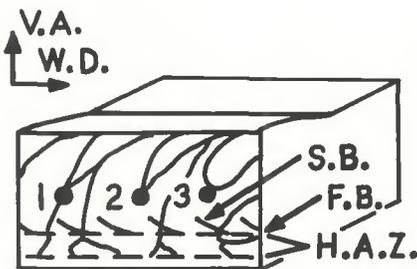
Schematic representation of longitudinal centerline plane section of a bead-on-plate weld. V.A. = vertical axis; W.D. = welding direction; F.B. = fusion boundary; H.A.Z. = heat-affected zone; S.B. = solute banding
